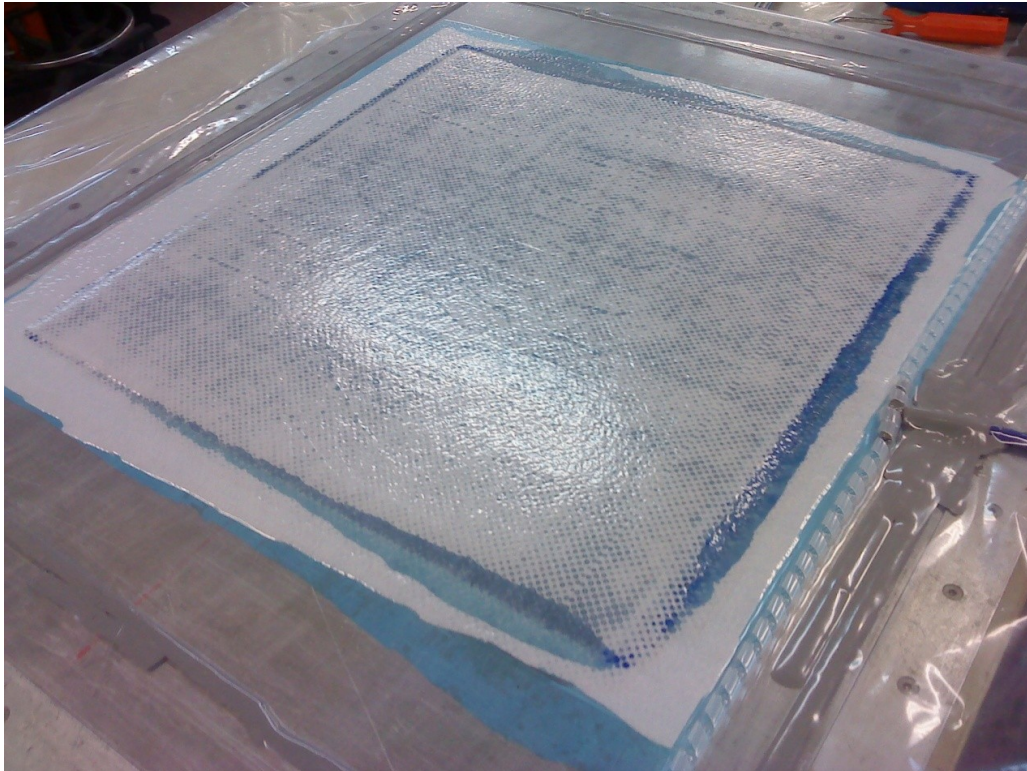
CFRP plate manufacturing with the vacuum bag lay-up procedure.
